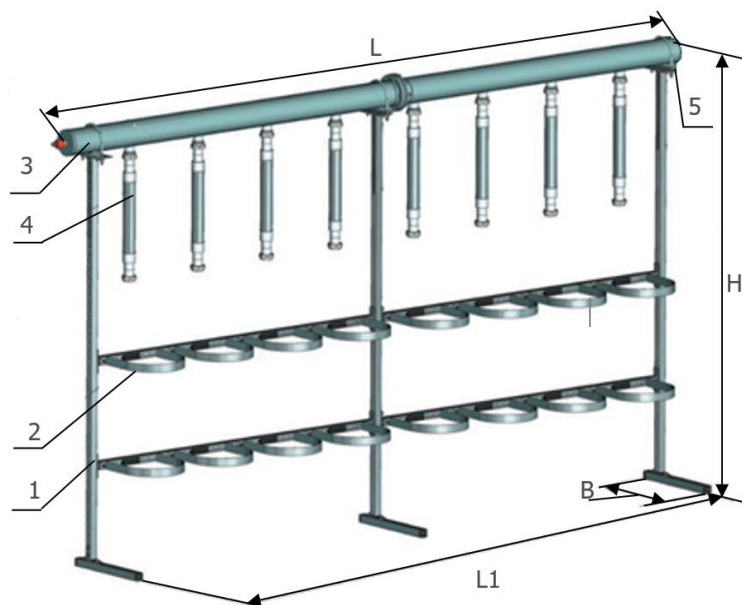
Overall view of single-row support stand СМПм and СМАм
